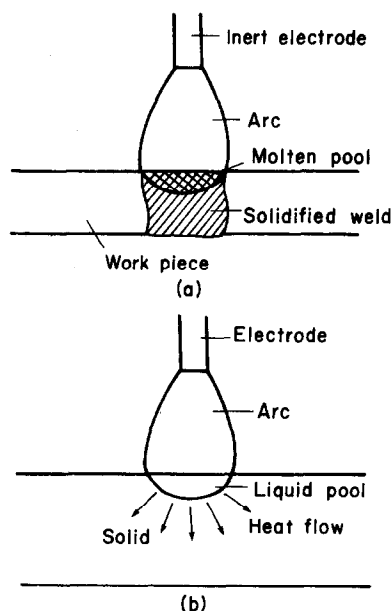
Schematic sketch of a TIG welding system.
